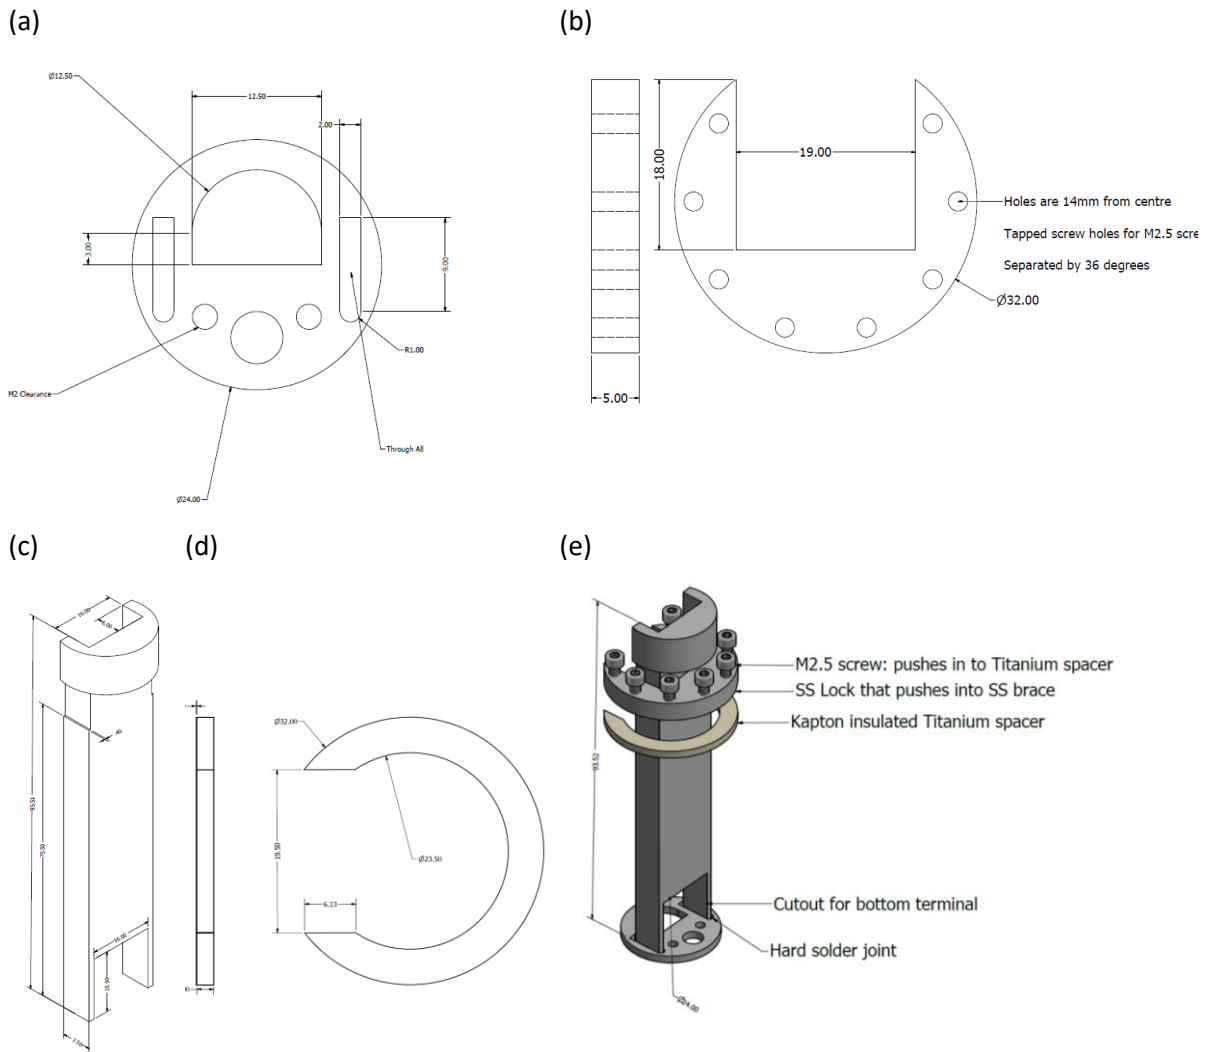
Drawings of the components in the measurement barrel clamping mechanism (a) Stainless steel plate (b) Stainless steel clamping mechanism (c) Stainless steel brace (d) Kapton insulated titanium spacer (e) Assembled clamping mechanism. [mm]
